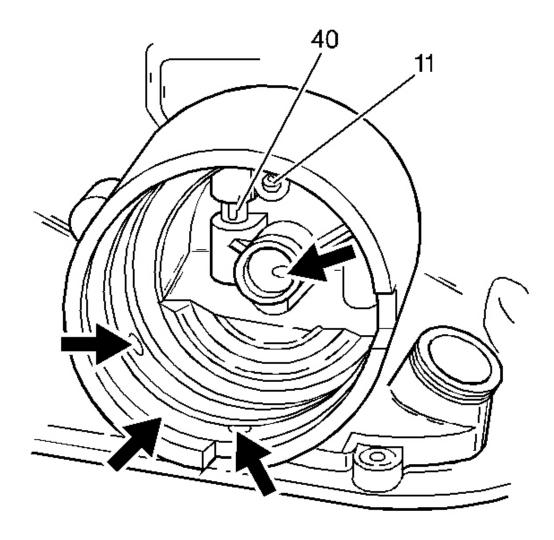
View Of Case Assembly Component Inspection Points Courtesy of GENERAL MOTORS CORP.
